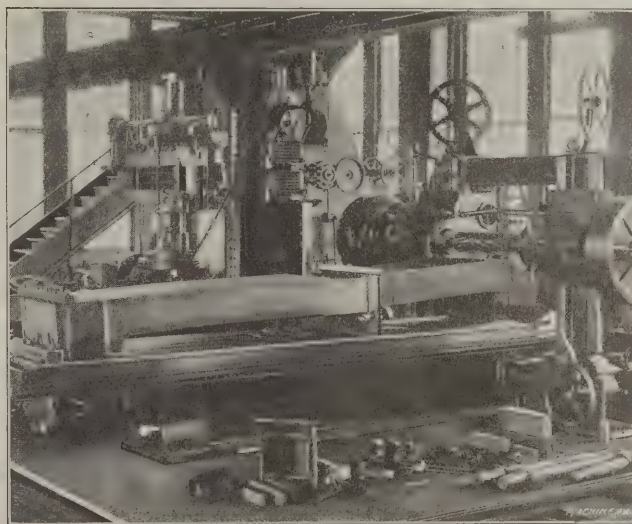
Stack of Trailer Frames blocked up for Milling Taper End
